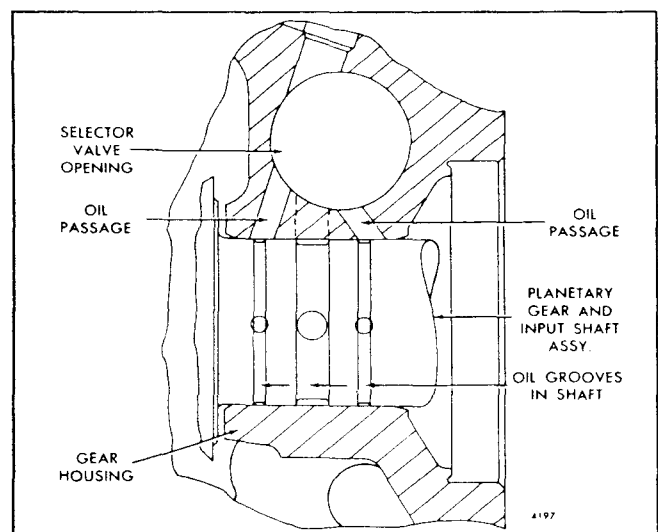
Location of Planetary Gear and Reduction Gear Input Shaft in Reverse Gear Housing Without Bushings
